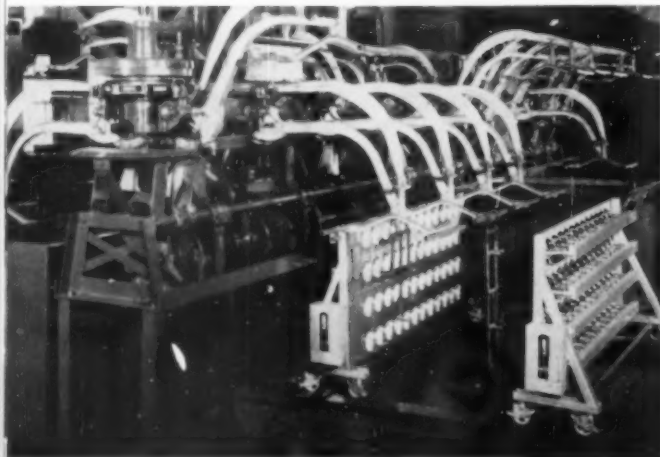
(Above) This full automatic plating machine has a double row type carrier arm of the non-agitating type. An auxiliary drier is shown at right.
